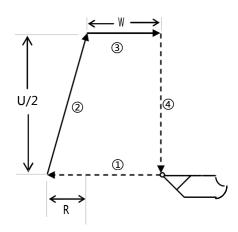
Offset direction of tool nose radius compensation in G94
